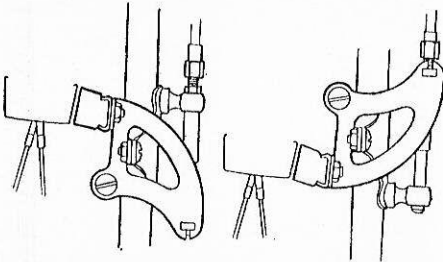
Modification to a Resilion cantilever brake to provide clearance for the Power Pak.
